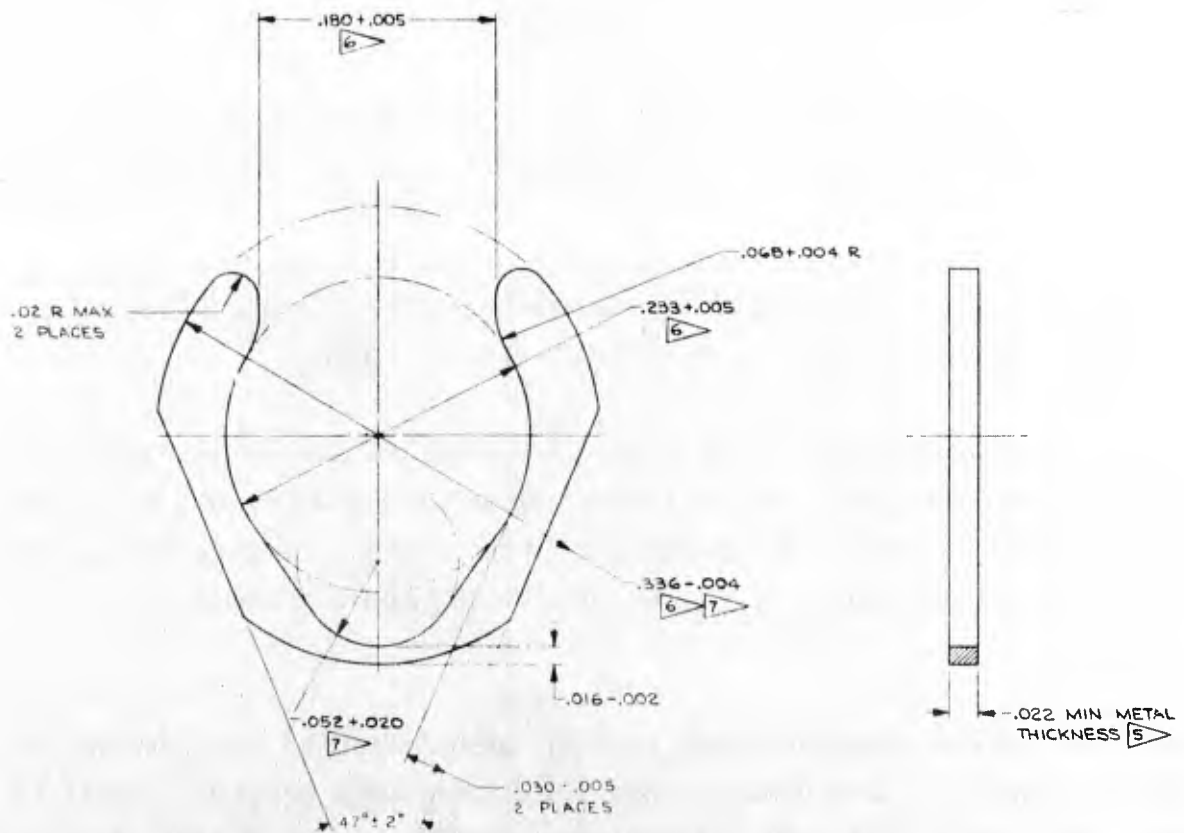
Rotor Detent Spring, Drawing Number 28009934
